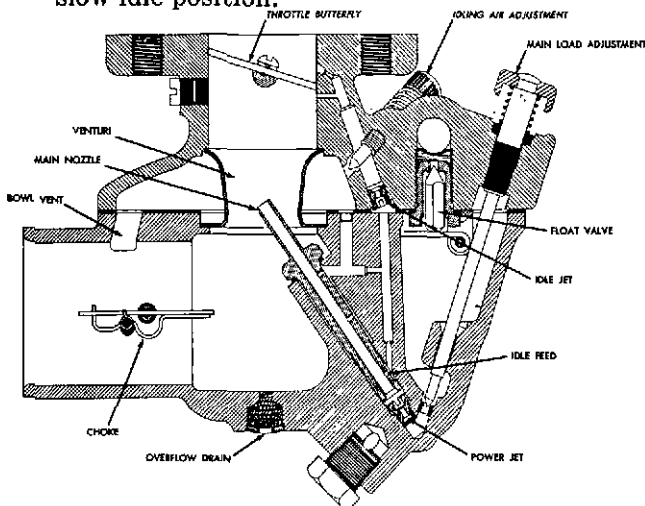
Sectional View of the Marvel-Schebler Carburetor
